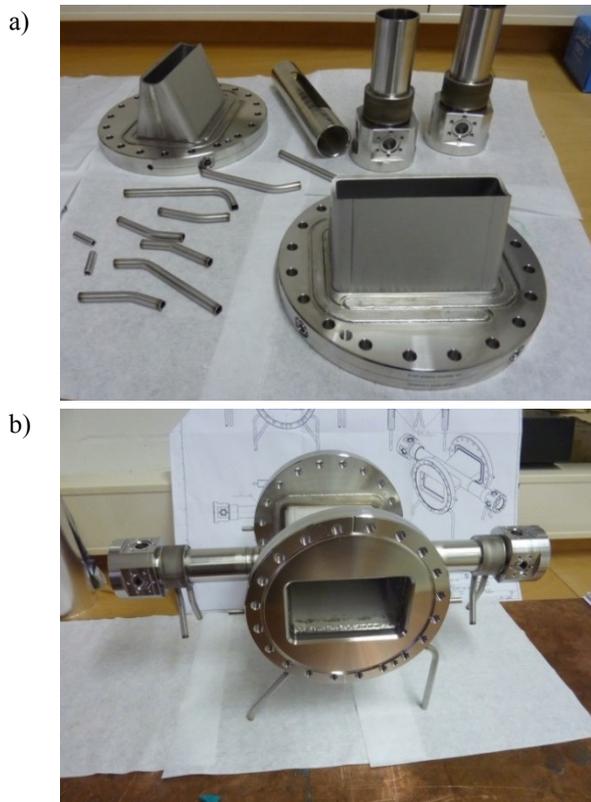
Fabrication of plasma cell body. a) fabricated parts. b) finished cell body, welded together.
